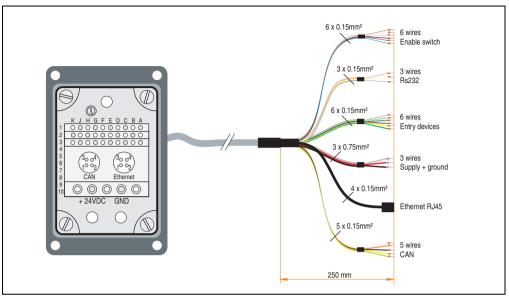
Cable layout - switching cabinet cable 5CAMPC.0020-00
